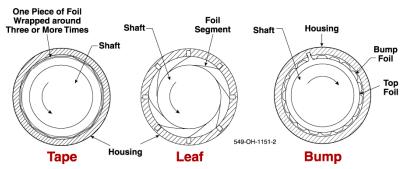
Three Types of Foil Radial Bearings – MSI Makes the Bump Style
